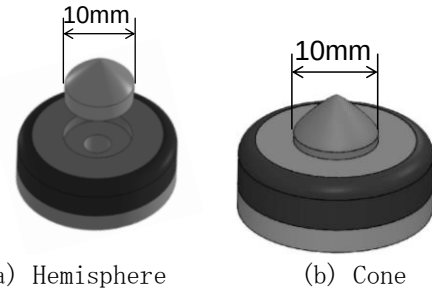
CAD of the contact part. A diameter is 10 [mm], and a height is 5 [mm]. In (a), a pressure sensor can be inserted under a hemisphere contact part.
